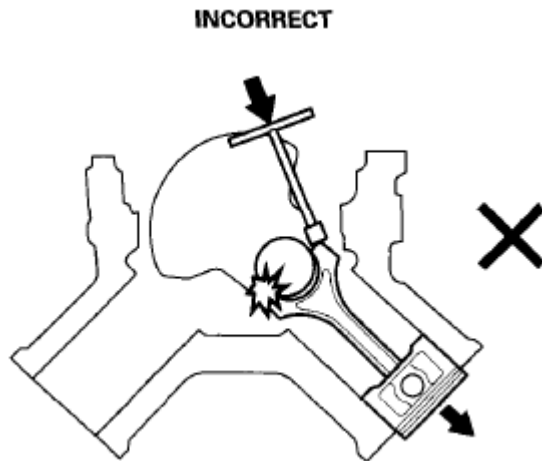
Pushing Connecting Rod In Incorrect Direction
